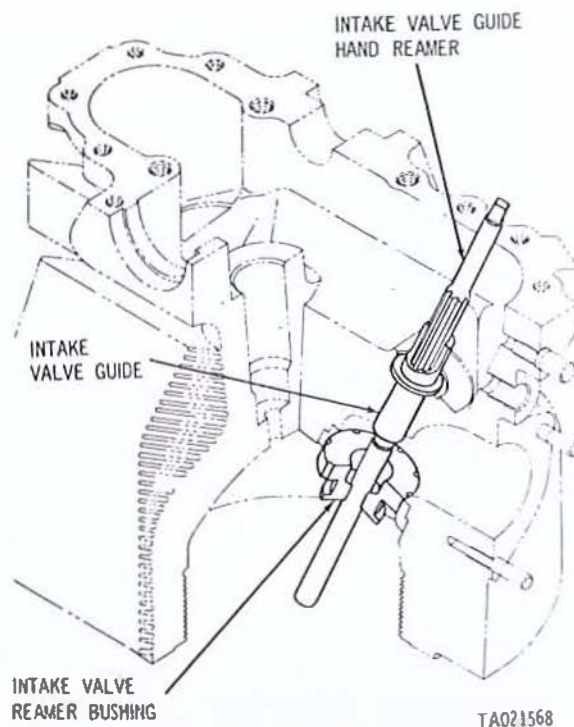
Intake valve guided hand reamer and reamer bushing positioned in cylinder head — sectional view.
